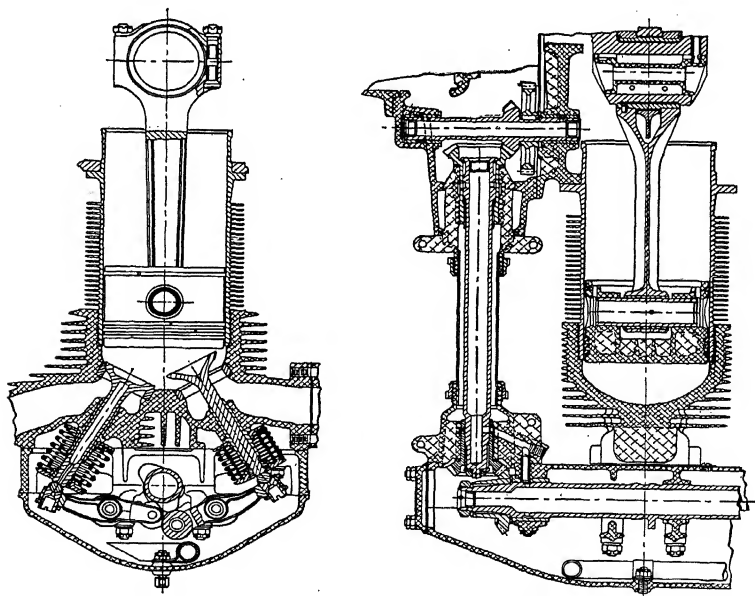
Arrangement of the valve gear used on the Ranger inverted air-cooled engines.
